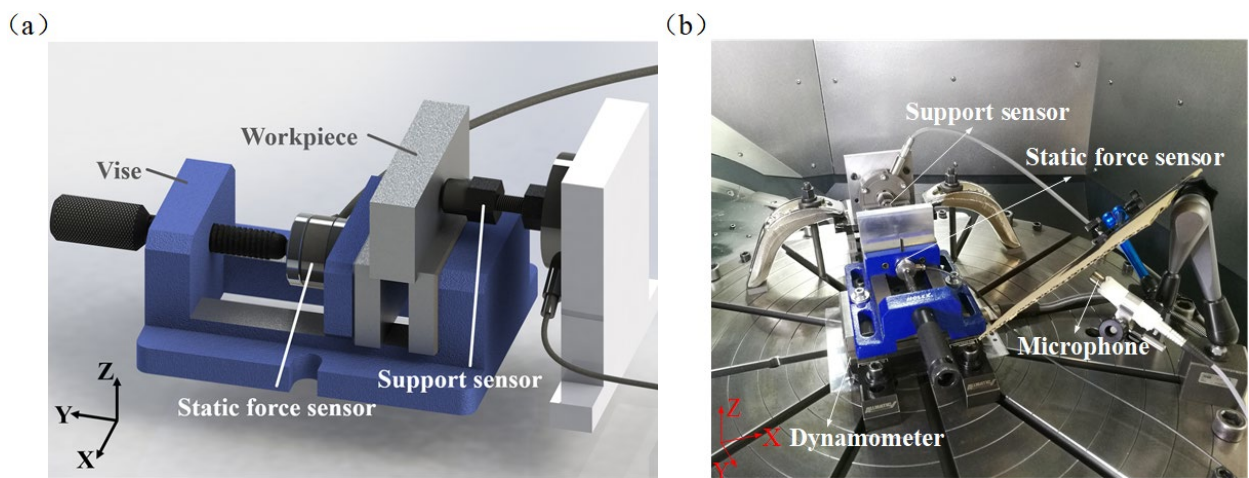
Milling experiments with the passive support; (a) schematic representation of the workpiece with the passive support; (b) experimental setup of the workpiece with the passive support sensor (GTM, Serie K-5kN). The passive support is applied at the center of the workpiece and the clamping force was kept at 3000 N.
